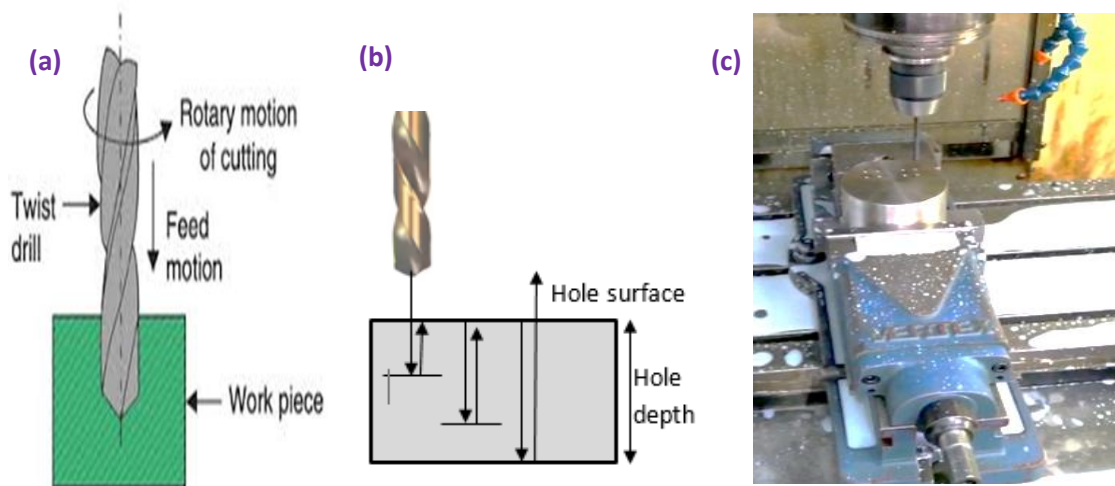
(a) Twist drill motions, (b) Schematic view of peck drilling, (c) Experimental setup for peck drilling
